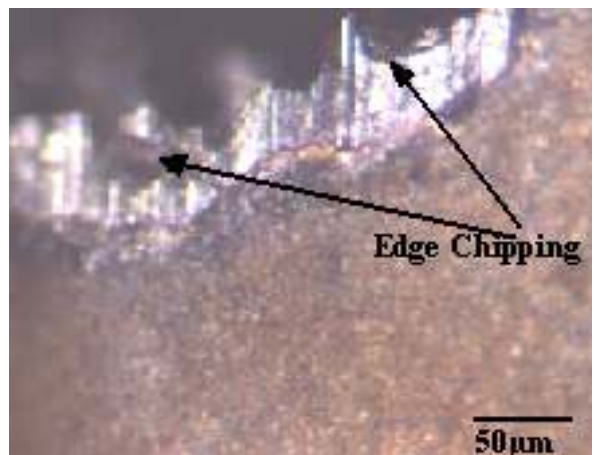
Carbide insert after 2 min of machining at V=180m/min, f=.07mm/rev
